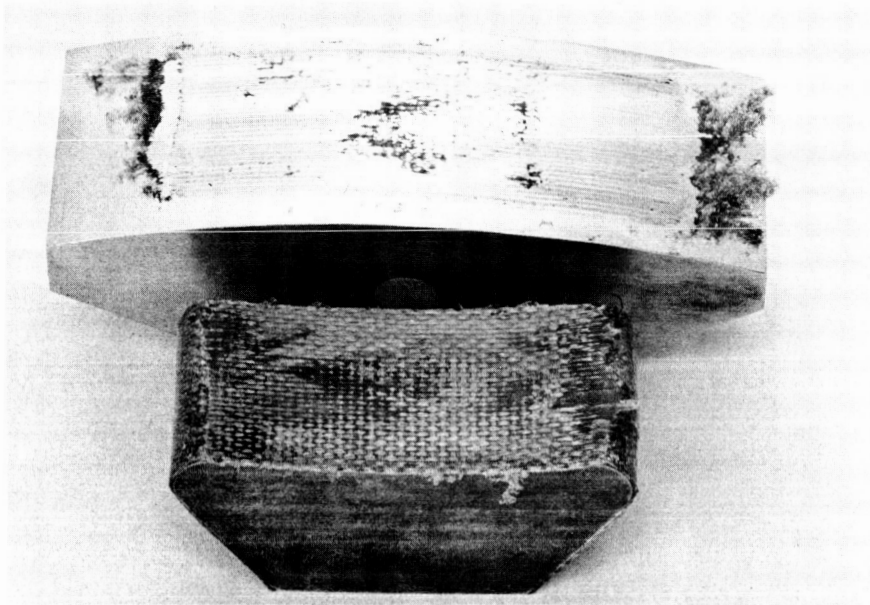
BALL JOINT TEST SPECIMEN TYPE - 18;
